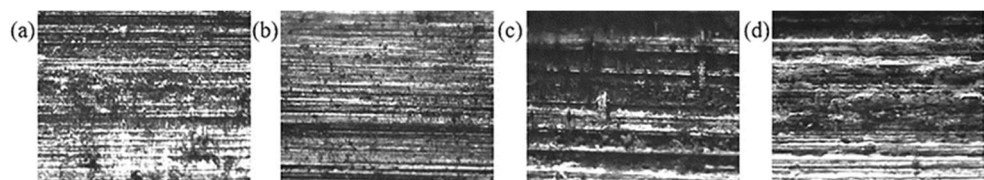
Slice diagram of 30 mm tooth width gear from tooth top to tooth root (a) the working surface of the gear, (b) the non-working surface of the gear, (c) tooth surface near the index circle, (d) adhesive wear phenomenon near the tooth root.
